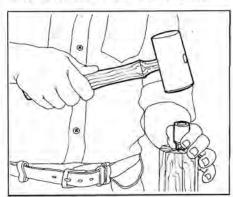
With a mallet, seat the drive center in one end of the workpiece and the cup center in the other.
